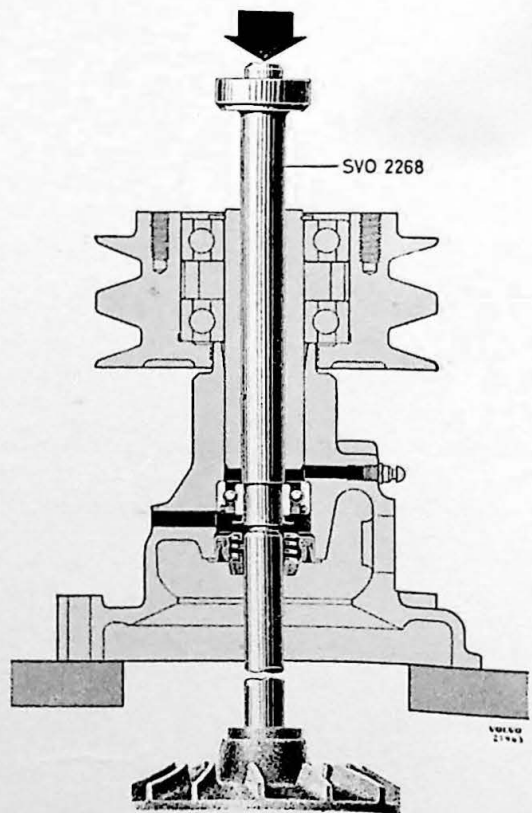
134. Removing impeller, shaft, seat, slinger ring and bearing.
